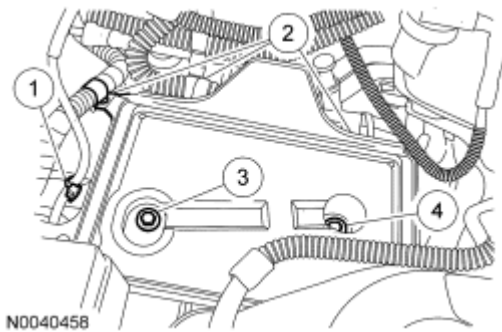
Identifying Battery Tray Nut, Bolt, Positive Battery Cable Fastener And Wiring Harness Retainer
